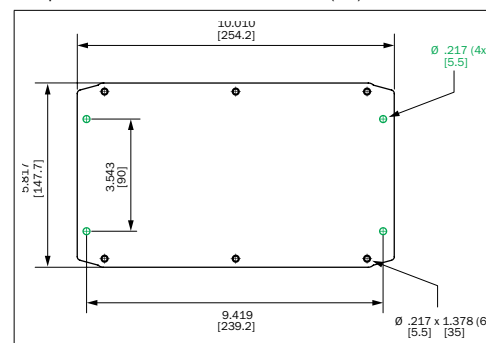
SIU, dimensions and mounting holes, (all dimensions in inches (millimeters))
